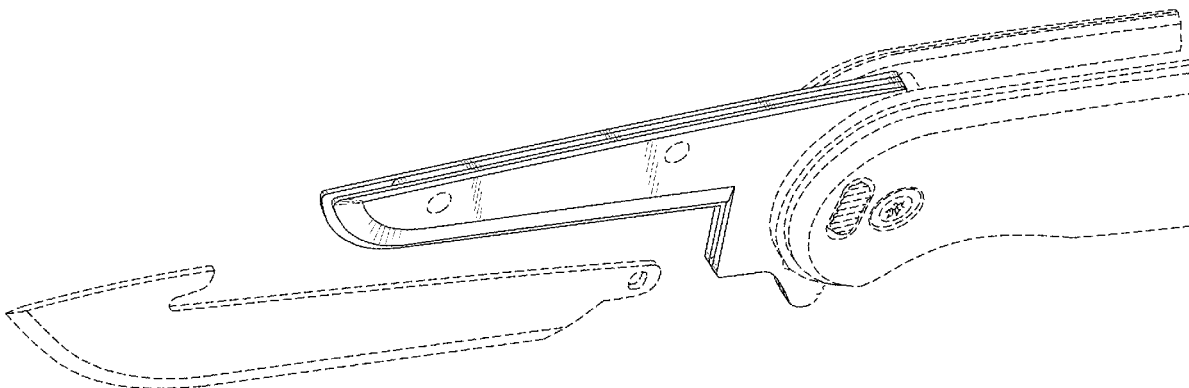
is a rear view of the blade holder of FIG. 1 in
